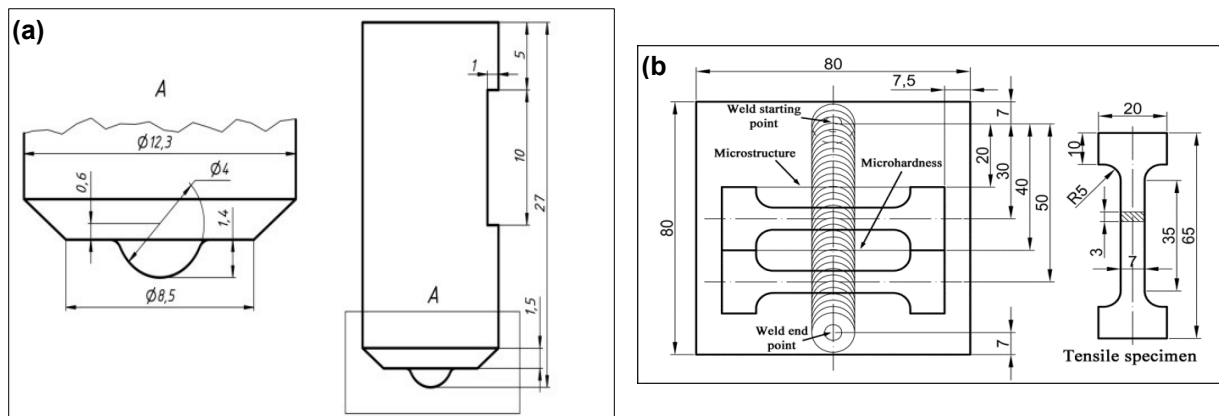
A schematic of the welding tool (a) and arrangement and dimensions of tensile specimens (b).
